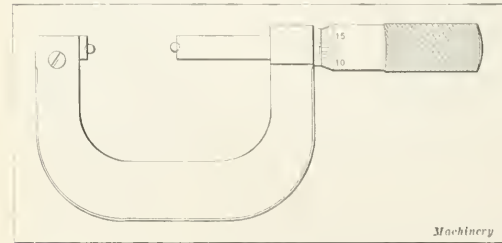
Micrometer with Hardened Balls fitted in Anvil and Spindle to adapt Tool for measuring Diameter of Threaded Work
